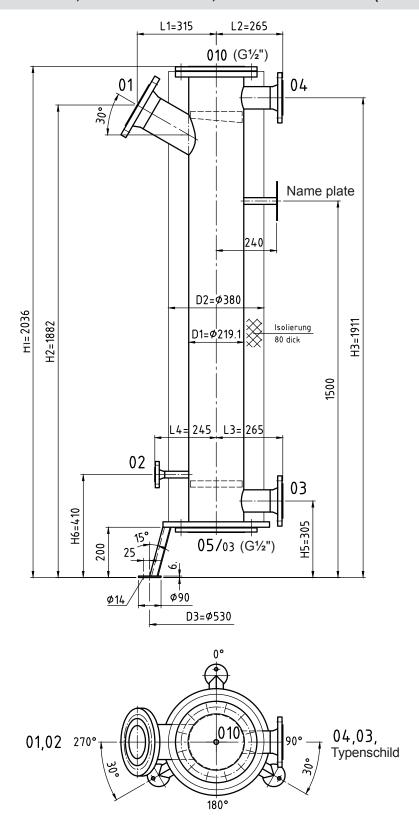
Dimensional drawing baelz 111 / 112 - here type 111-219-195-15
